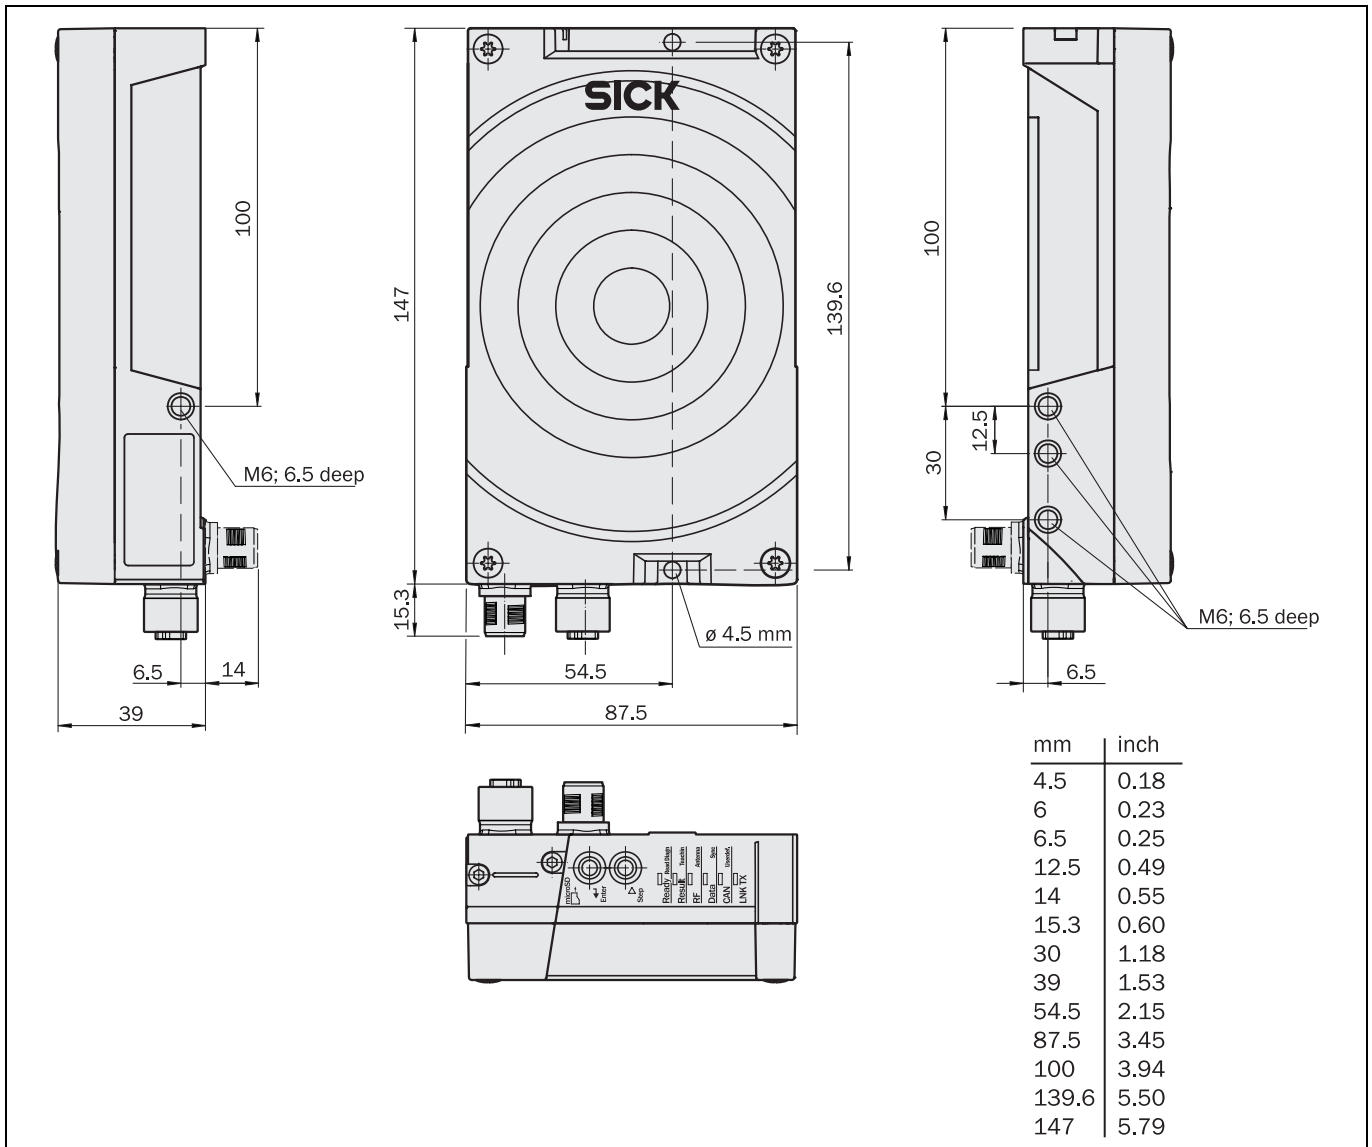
Ethernet version: Dimensions of the interrogator (RFH620-1001201)
